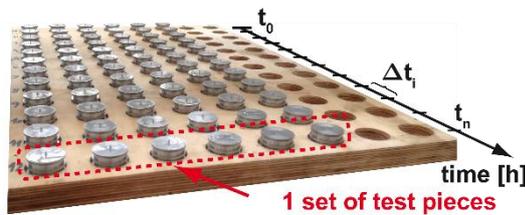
Several sets of manufactured test pieces on the six-spindle automatic lathe [14]
